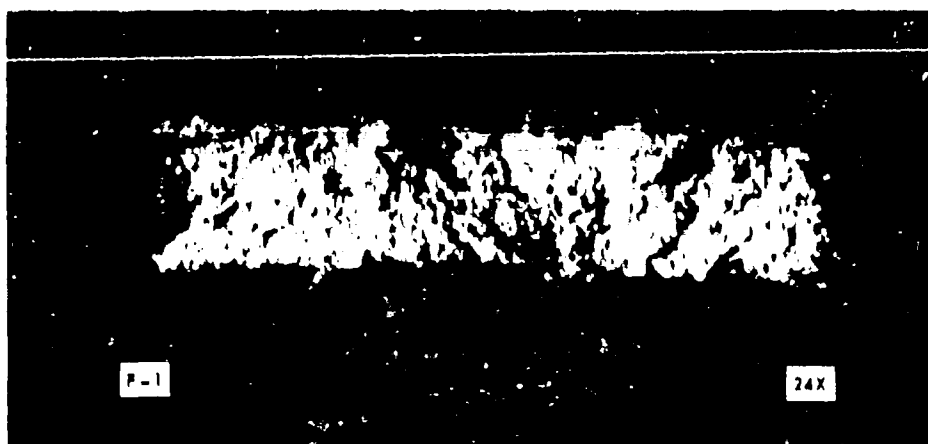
Welded Specimen F-1. Discoloration on Periphery of Fracture Surface. (Environmental-test conditions: 1800F, 3 ksi, salt; duration: 63 cycles) (H-84101, Mag: 24X)
